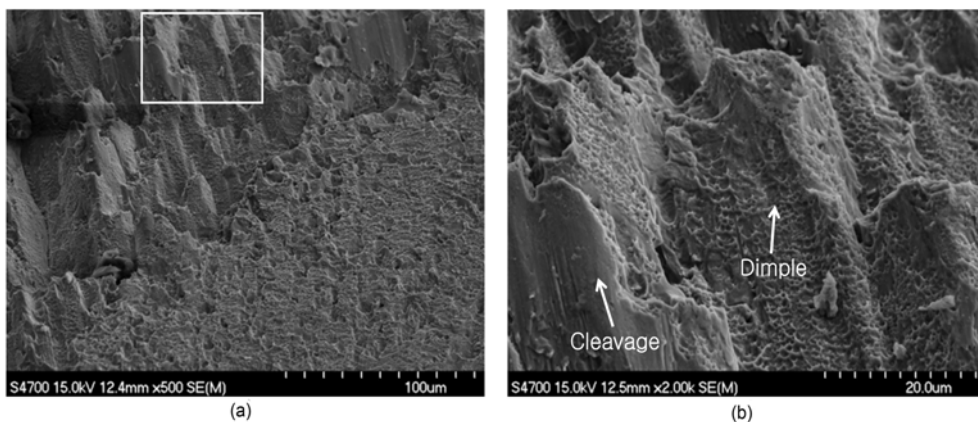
Fracture surface of Welded INCONEL 718 Alloy. a) Fracture of cleavage & dimple and b) Fracture of dimple in cleavage.
